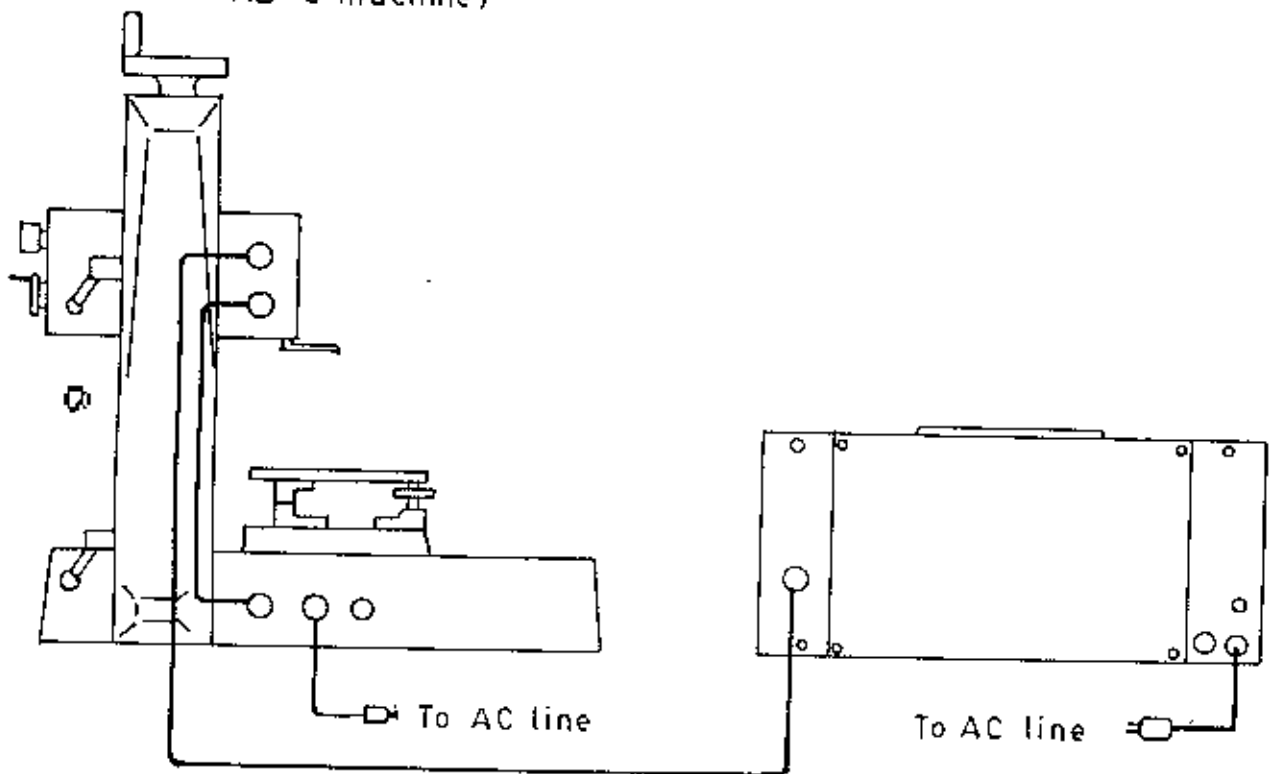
Surface roughness measuring equipment (surf. test AB-5 machine)
